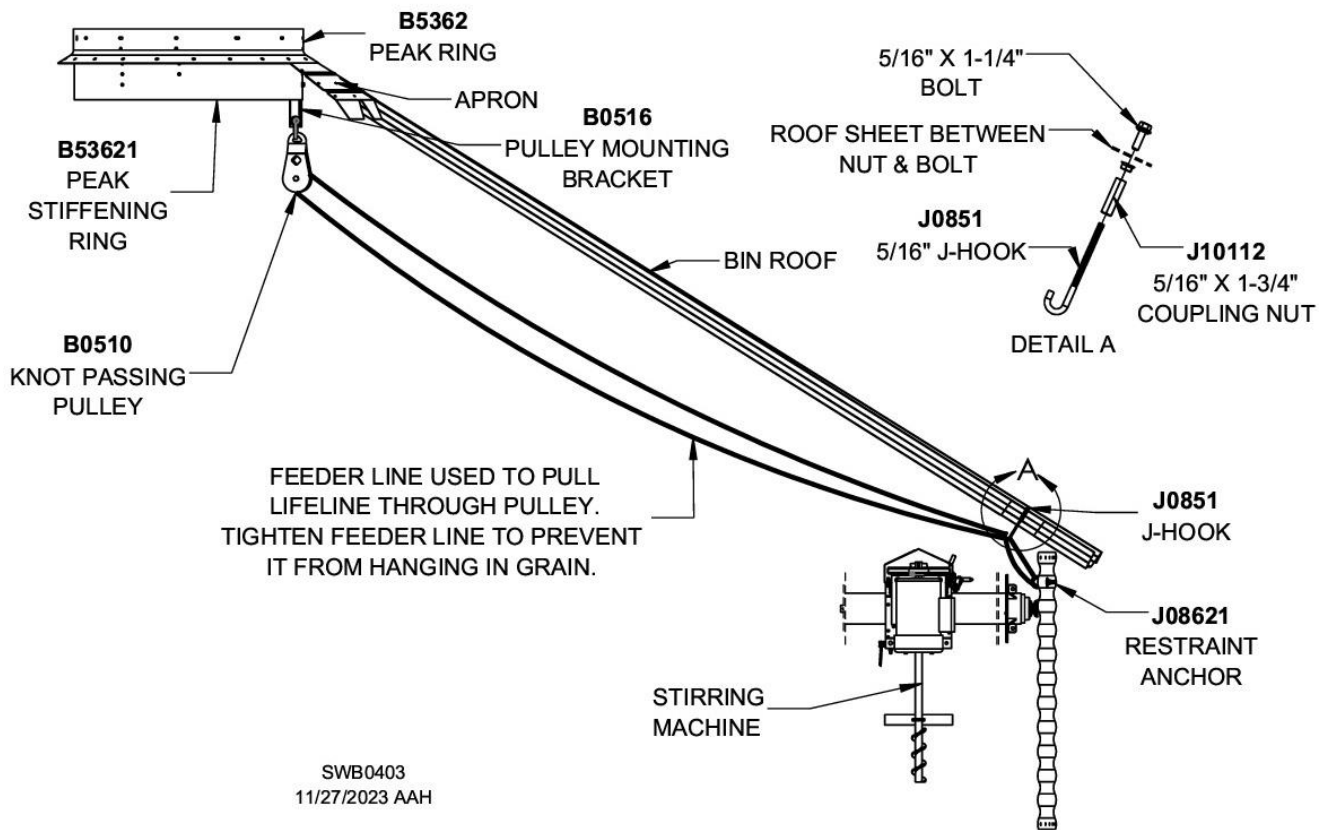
Knot-passing pulley, restraint anchor & J-hook installation
